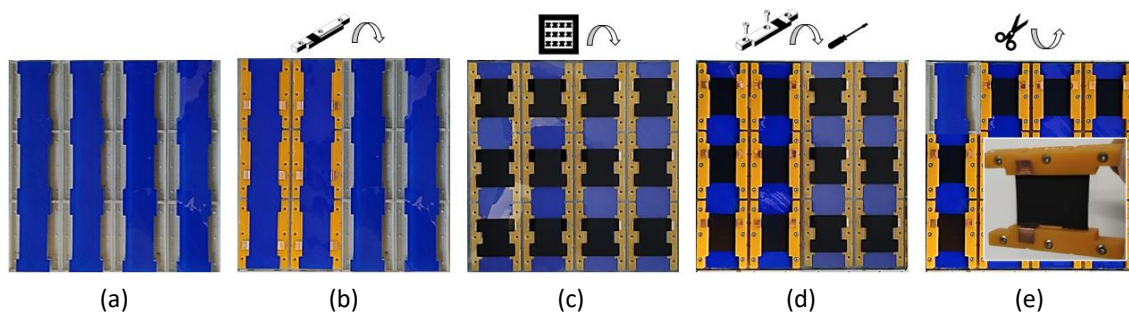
Assembly process starting from assembly stencil provided with TPU-cutting pads (a), putting lower SIP clamps in its recesses (b), aligning metal frame with printed elastomer film on top (c), fastening upper clamps by torque-controlled screwing (d), and cutting out samples (e).
